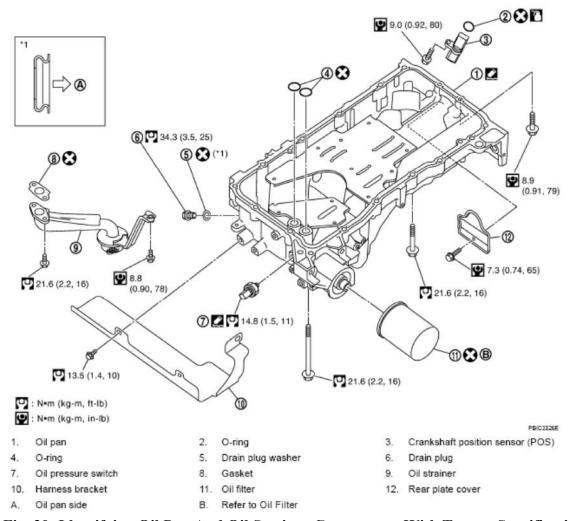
Identifying Oil Pan And Oil Strainer Components With Torque Specifications
